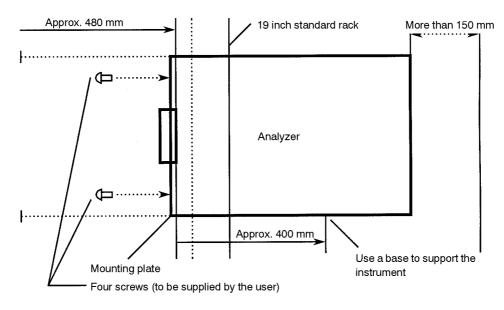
Mounting the APMA-370 on a 19-inch rack
